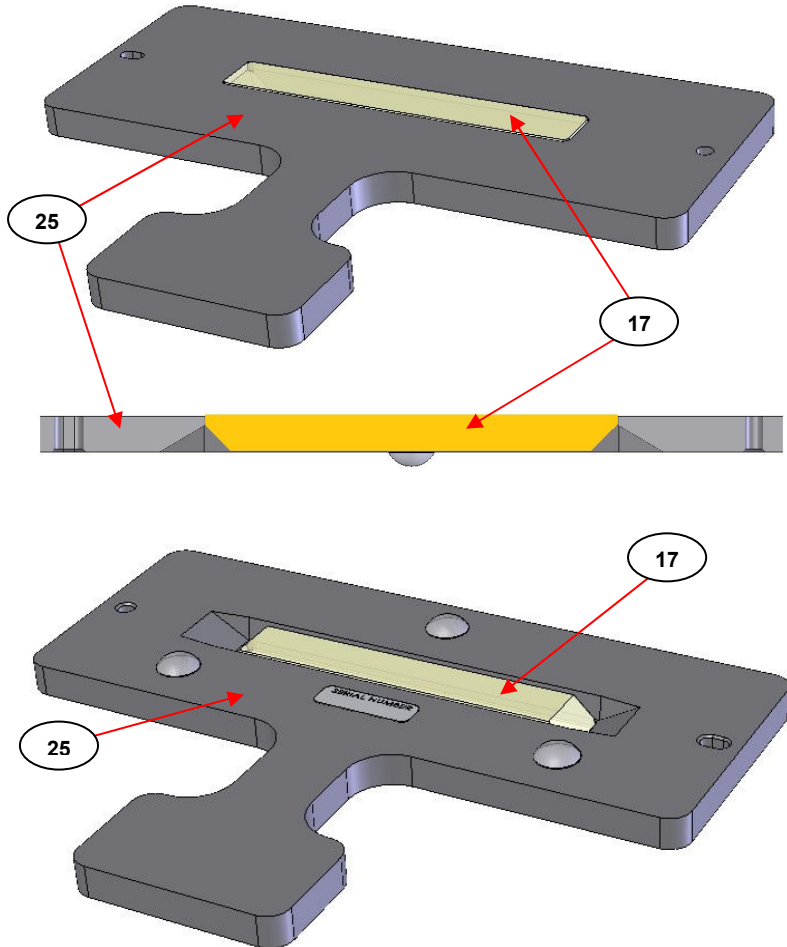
Gateway™ ATR Accessory Flat Top Plate Assembly, Top, Side (Cross Section) and Underside Views
